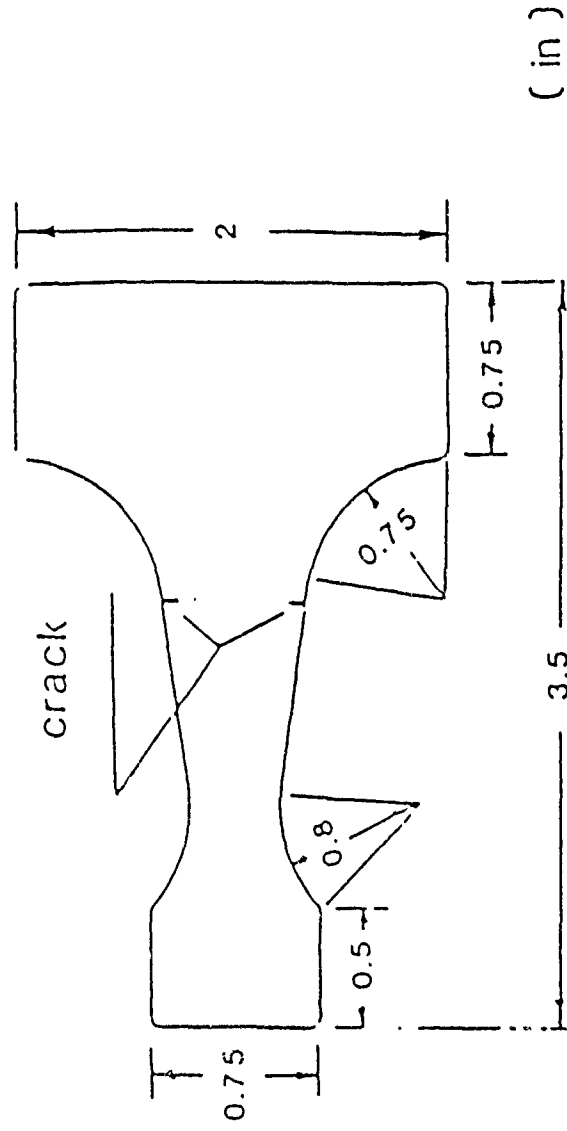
Fatigue specimen made of 1100-O aluminum with cracks.
